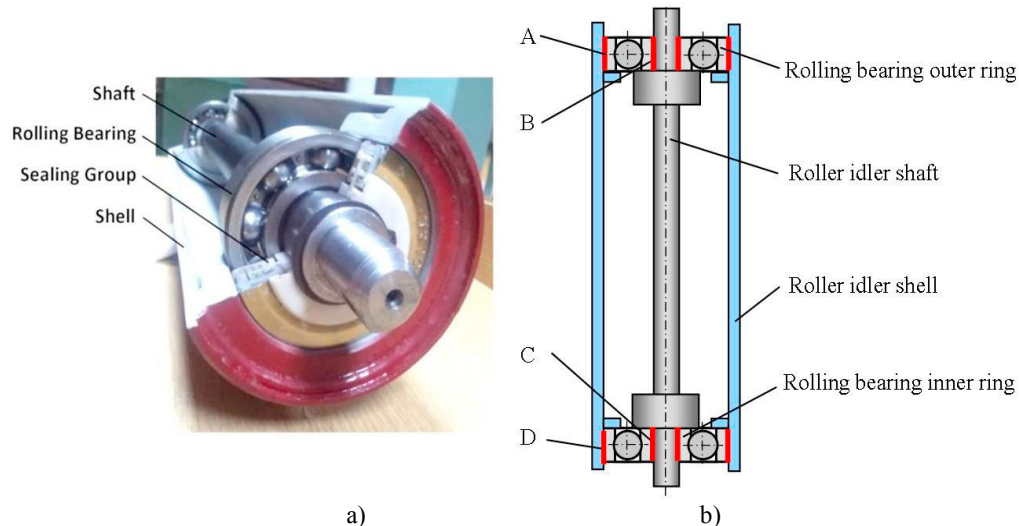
A typical conveyor idler assembly (Mišković 2017)
